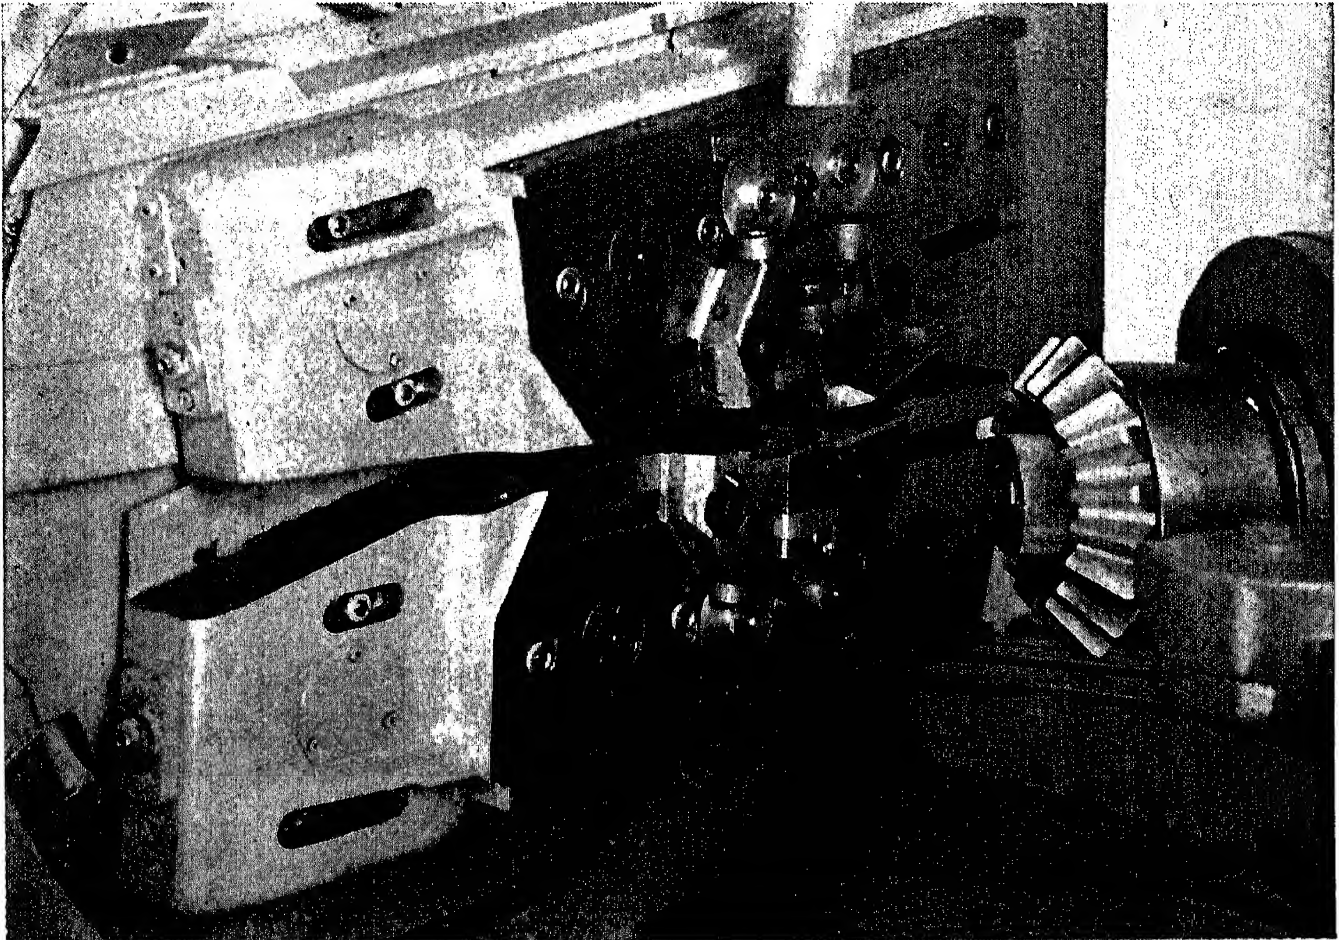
Straight tooth bevel gear and generating tools on a straight bevel gear generator. (Courtesy Gleason Works.)
